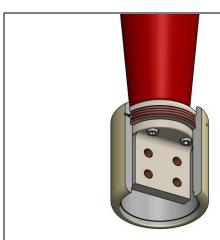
Removable Screwed type electrode fixed with grub screw
